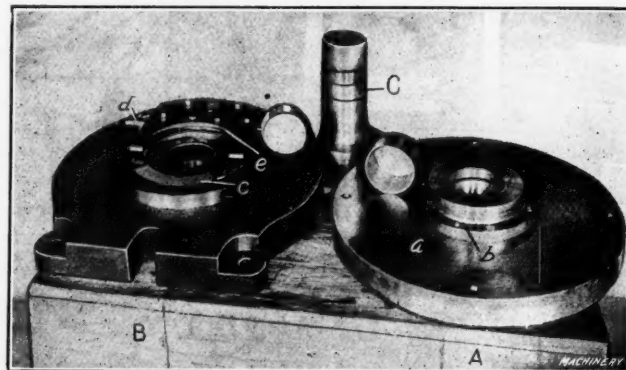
Tools used in blanking and drawing a Large Steel Cup in One Operation
